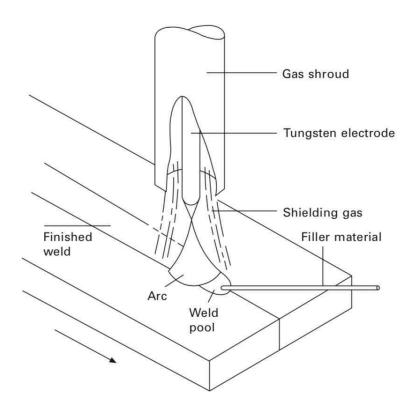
TIG welding process (Source: Norrish, 2006)
